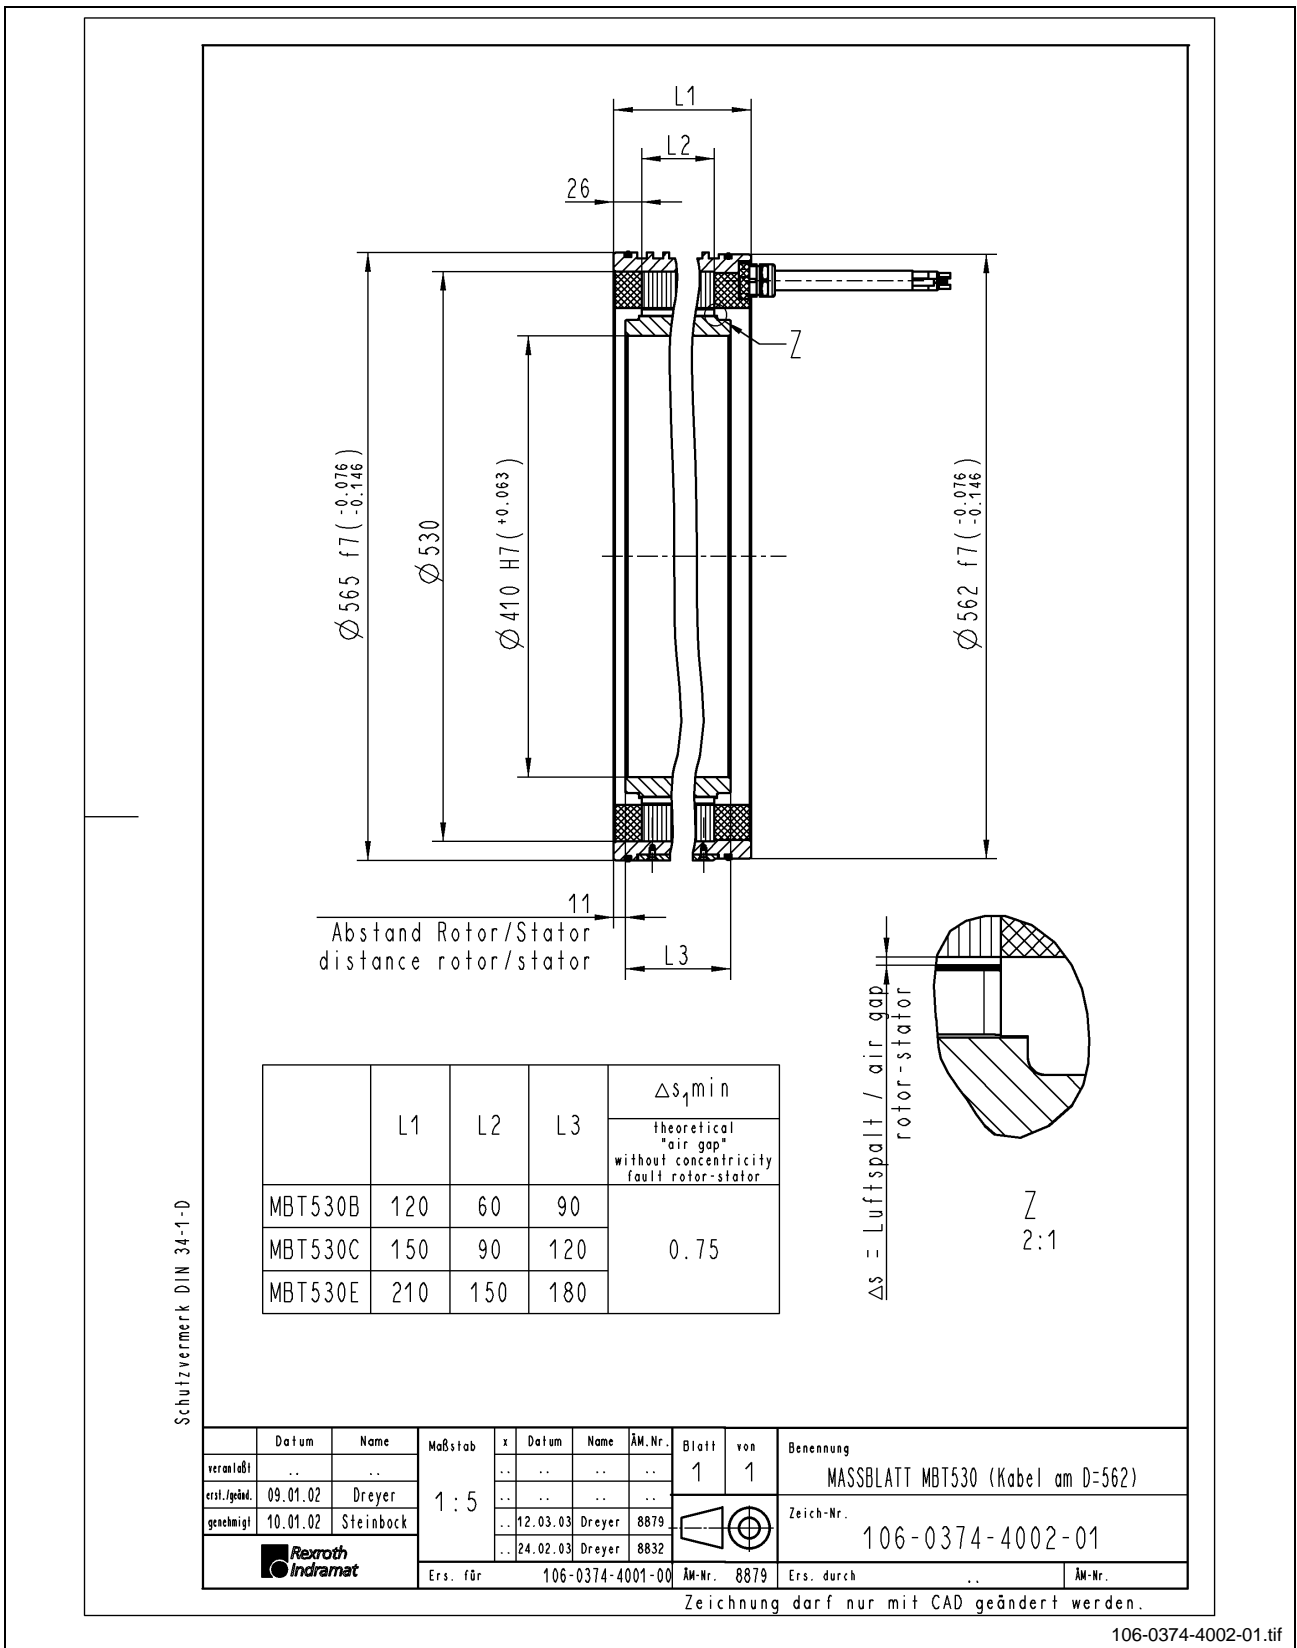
Dimension sheet size 530, electrical connection "SN"
